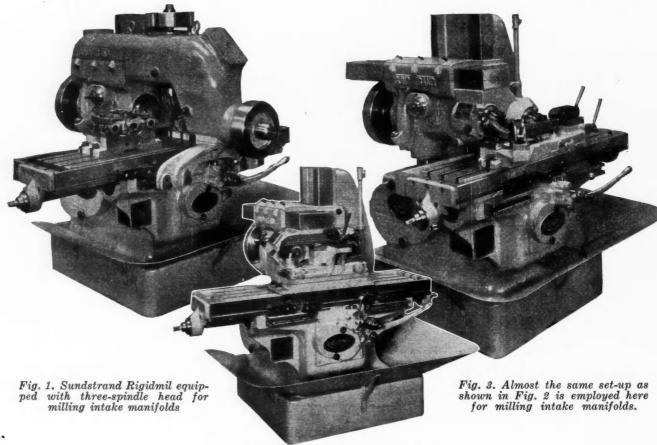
Addition of a special twospindle head permits two pads of an exhaust manifold to be milled simultaneously
